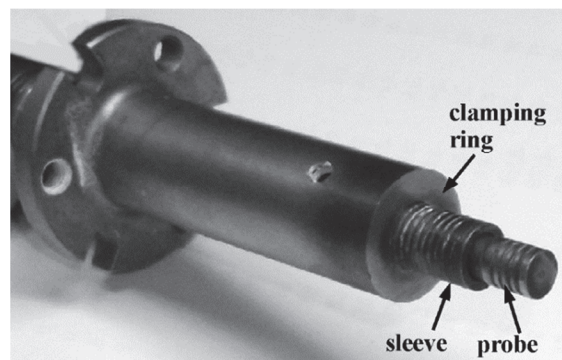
Tool for Friction Stir Spot Welding process.
